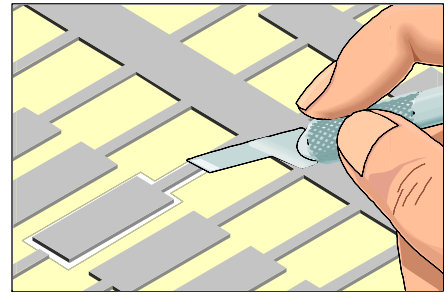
Cut out the new surface mount pad. Cut from the plated side.
